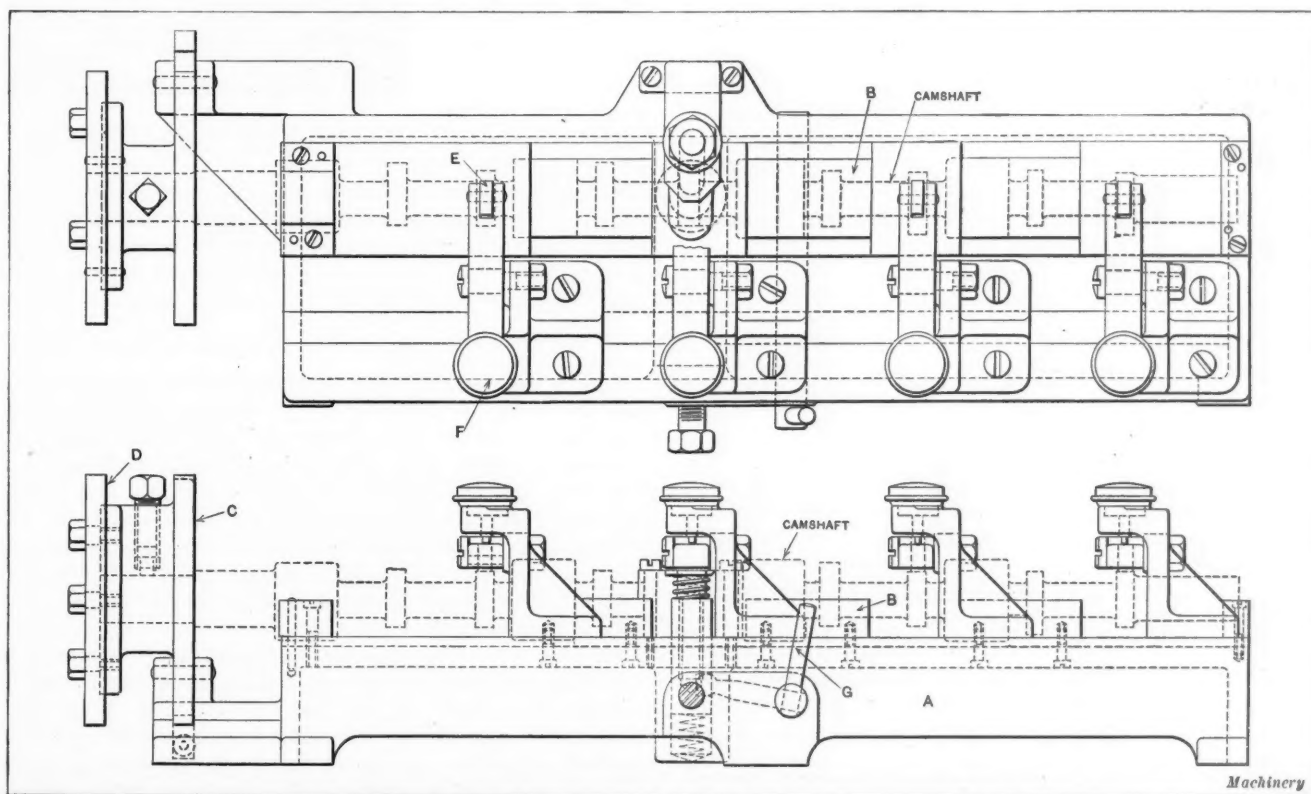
Multiple Type of Cam-shaft Testing Fixture used for inspecting Cam-shafts for Twin Four-cylinder Engines
